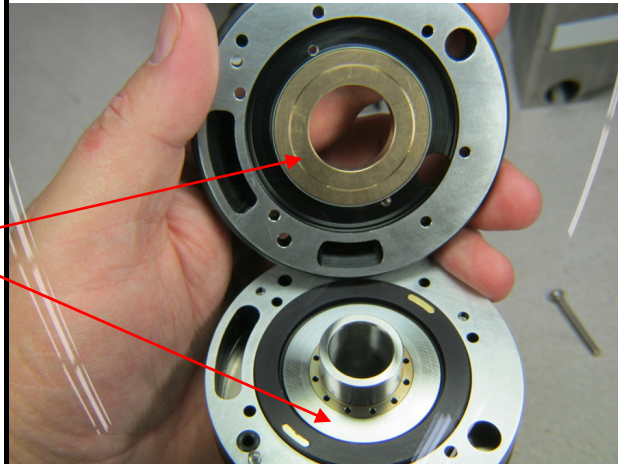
Rear Thrust Bearing and Shaft Thrust Area
